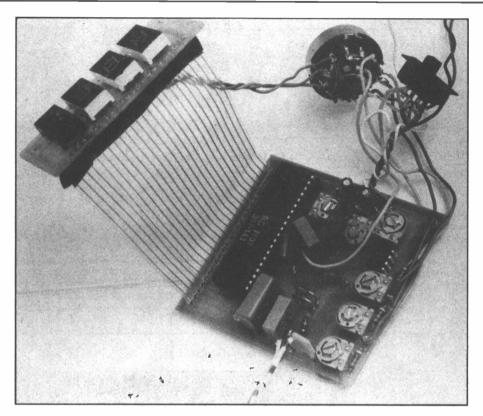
An 'exploded' view of the Millivoltmeter, before final assembly.
